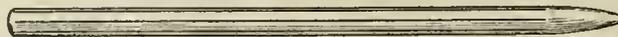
Punch for making the bore holes. This is driven in with a heavy hammer.
